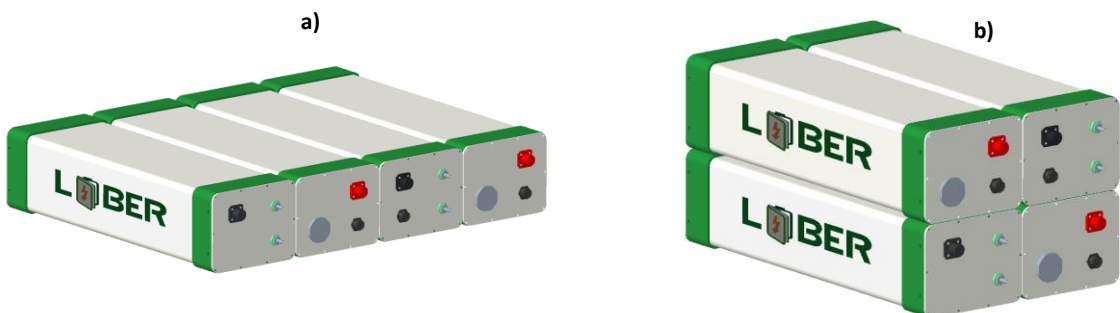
Possible mechanical assembly of 4 modules. a) in line; b) matrix
